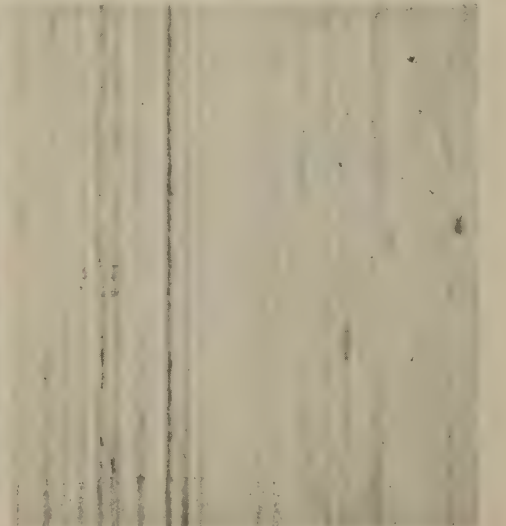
Bearing of Similar Metal Lubricated with Added Pyroil.
